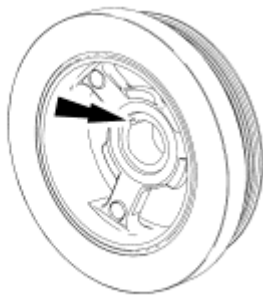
Identifying Woodruff Key Slot In Crankshaft Pulley
